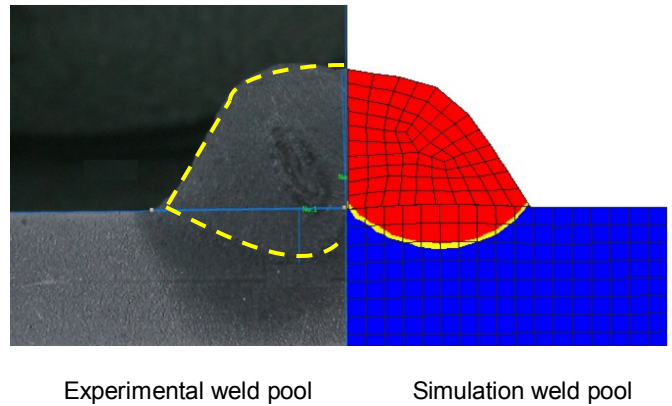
MEASUREMENT OF WELD POOL SHAPE.
